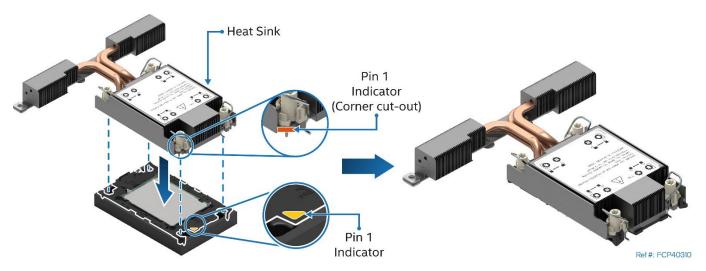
Pin 1 Indicator of Processor Carrier Clip
